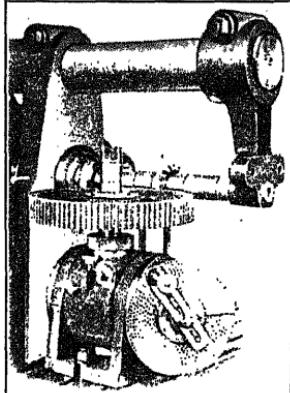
Milling gear teeth. Kempsmith Mfg. Co., Milwaukee.
